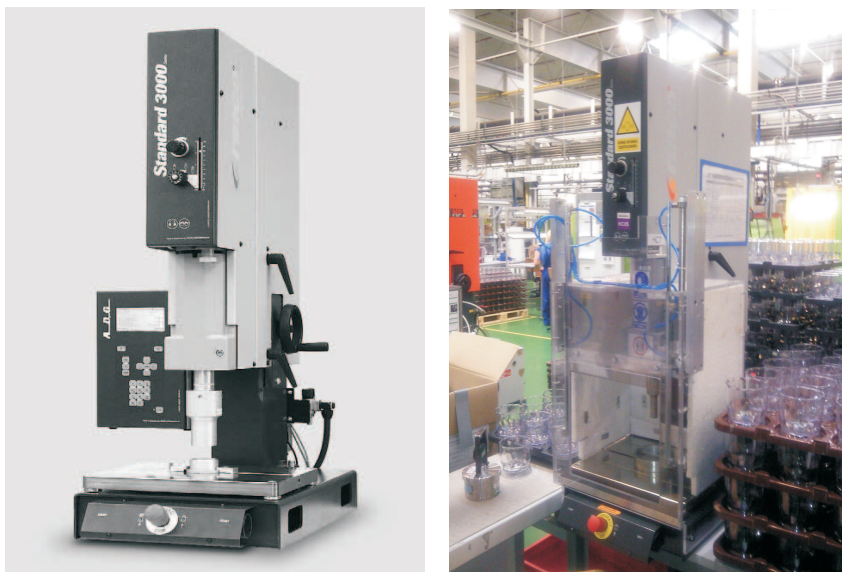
The welding machine before and after rebuilding, i.e. with the sound-absorbing and insulating enclosure.
